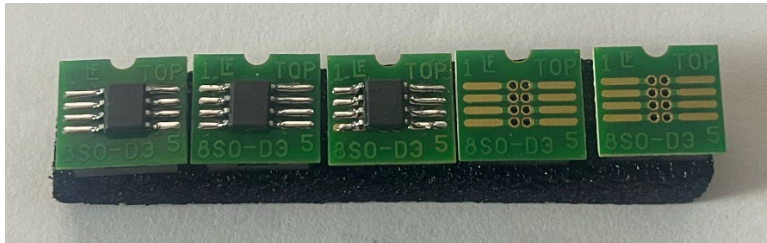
SOIC-8 SMT to DIP PCB with ADA4530-1
